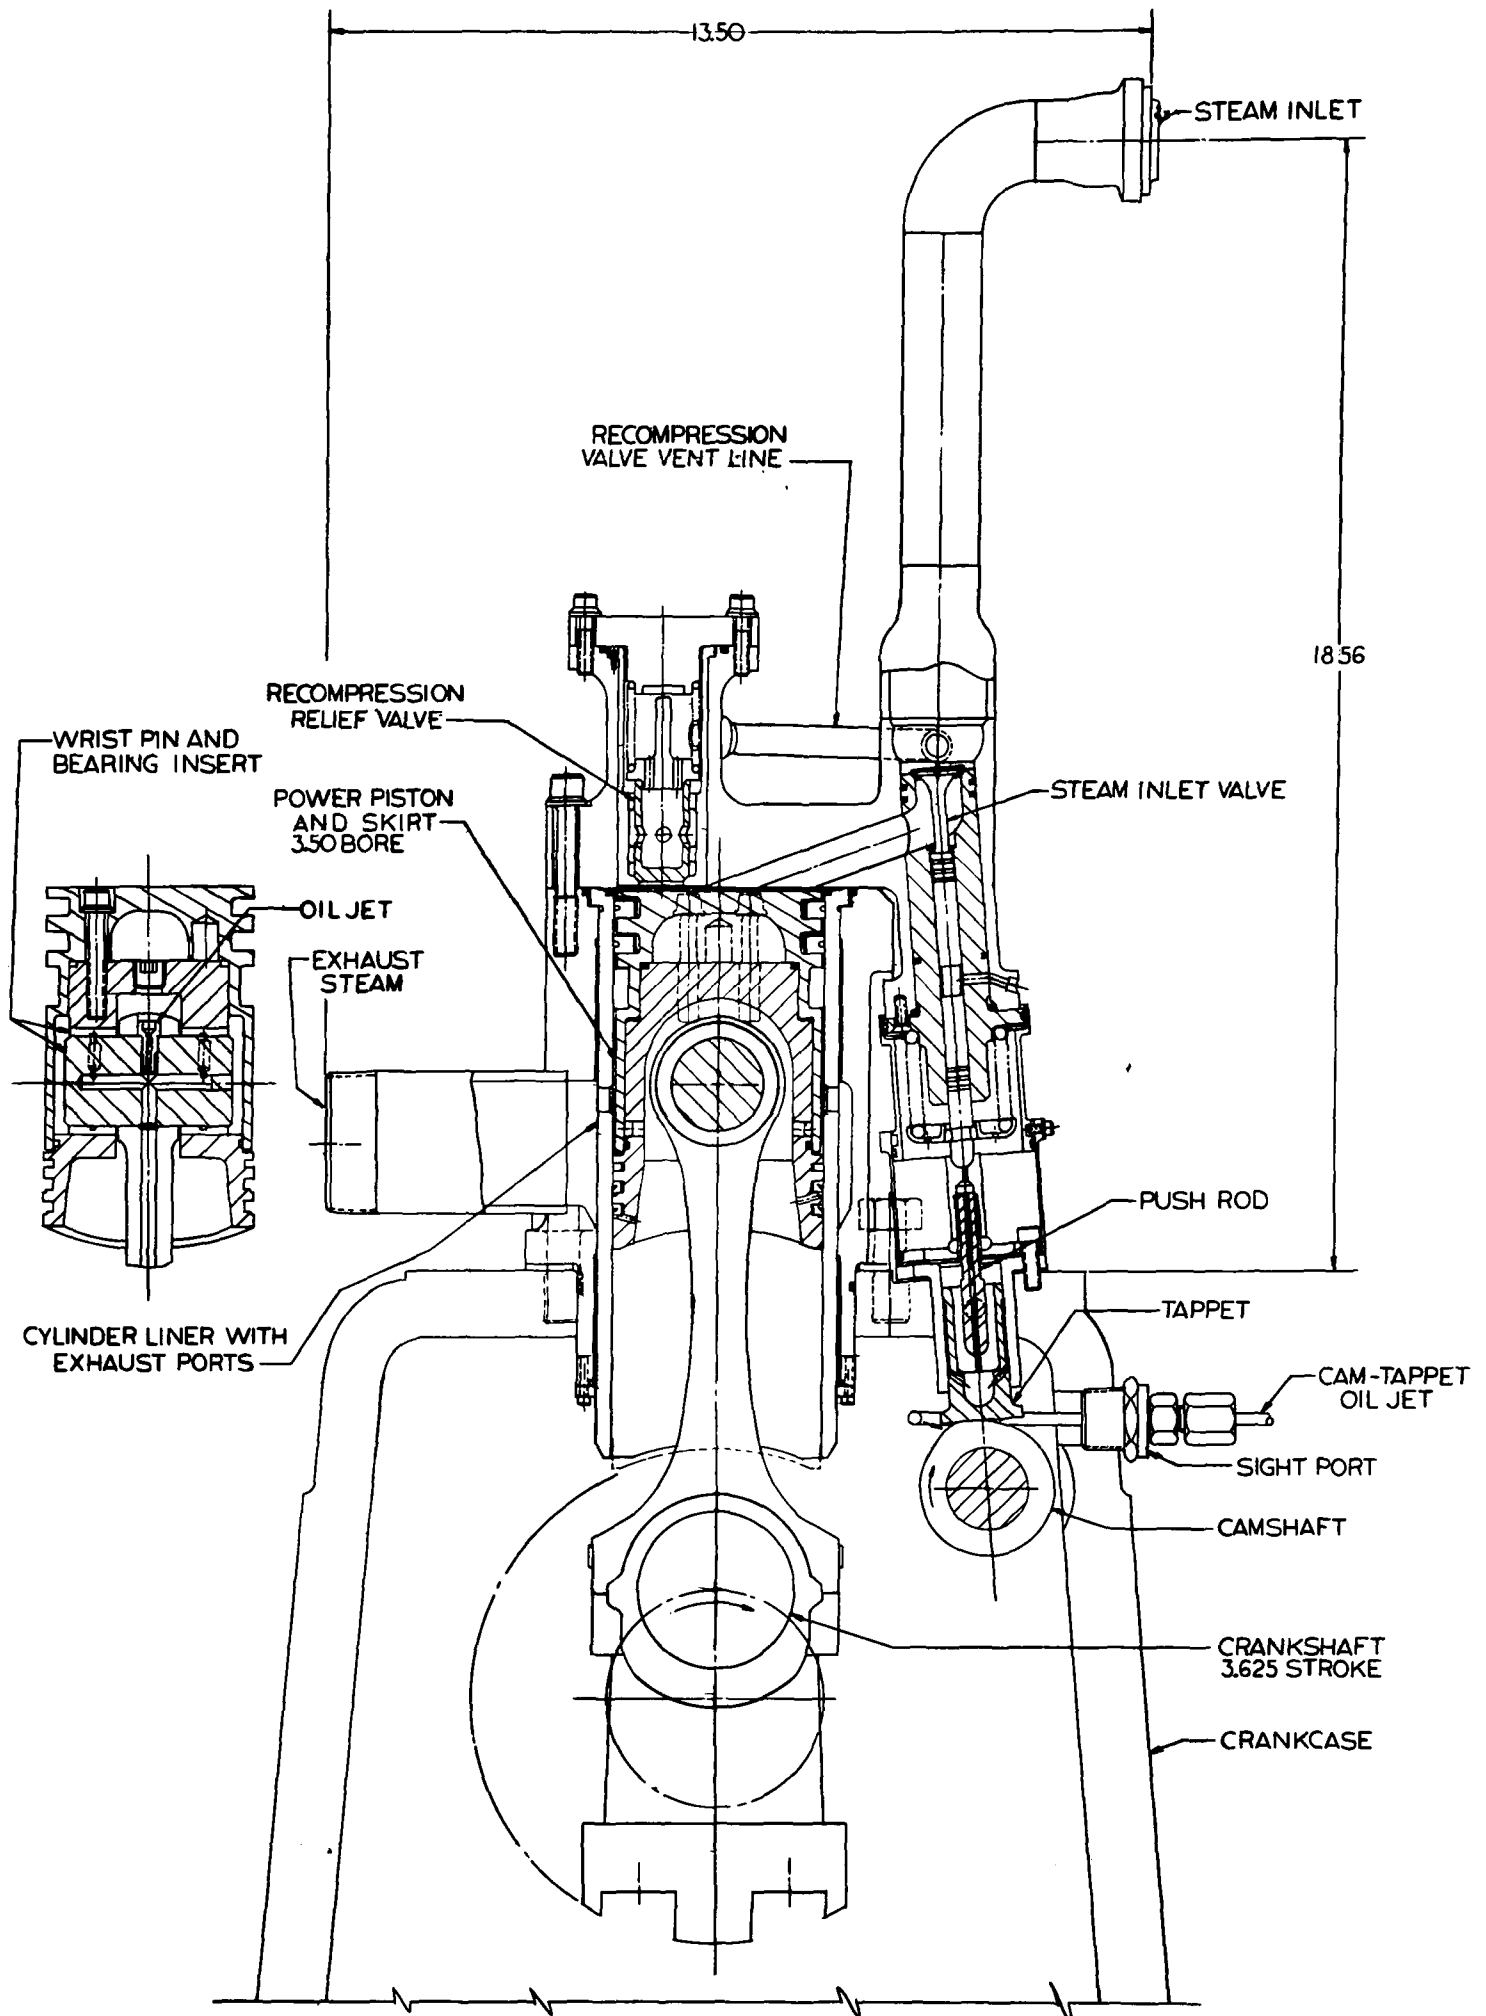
Assembly of Trunk Piston Expander (Dwg. 707E743).
